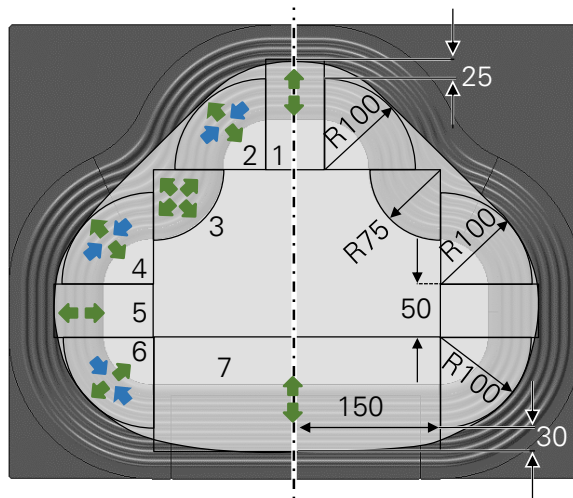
The superposing method for analysing the deep drawing of the T-Cup
